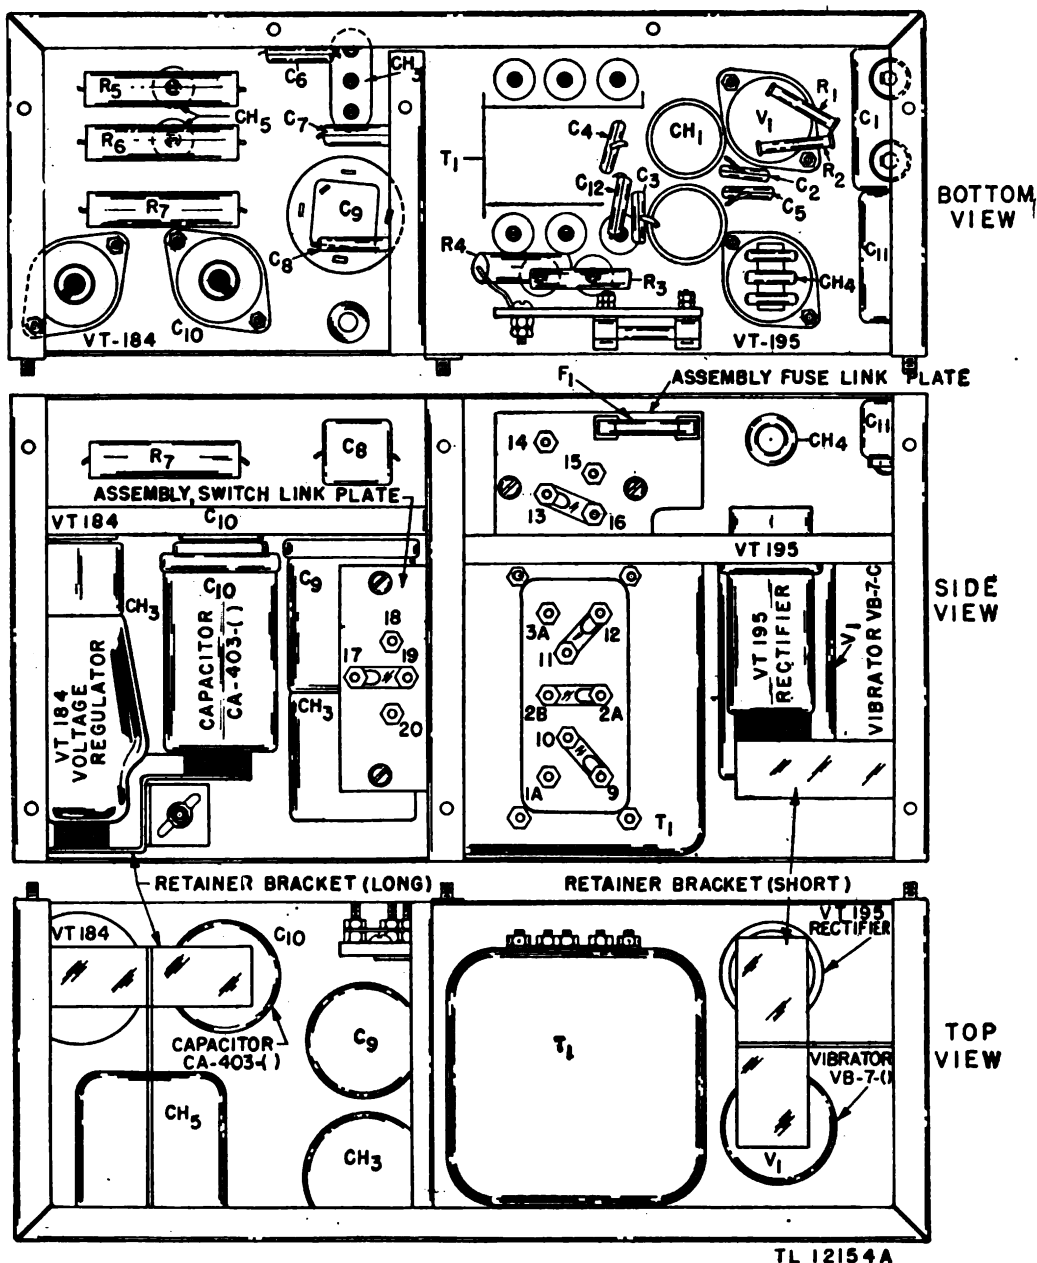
Plate Supply Unit PE-117-C, parts location detail.
